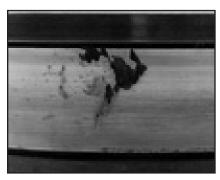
A tapered roller bearing inner race (cone) with spalling from debris contamination bruises.
